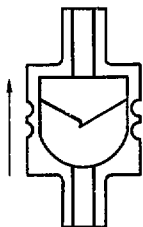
Stainless steel welded burst disc, 340 kPa, Pike #A3897-4.
